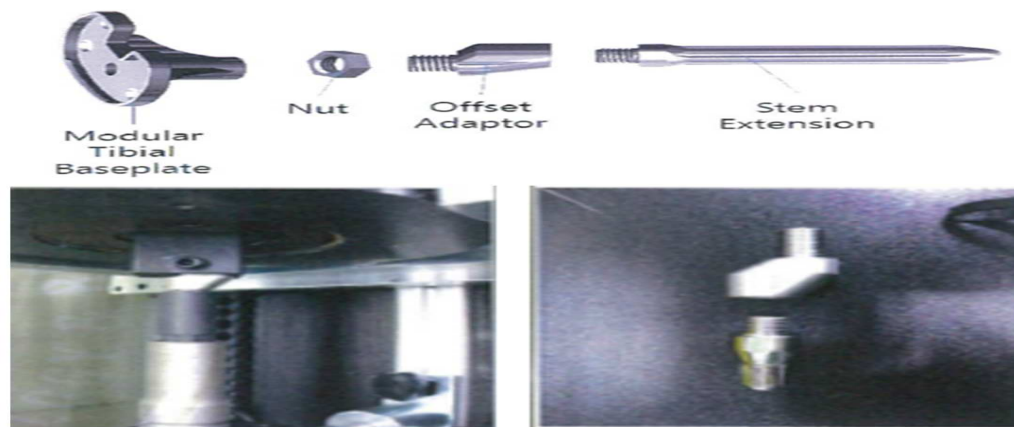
The assembly/disassembly locking test with offset adaptor and stem extension
